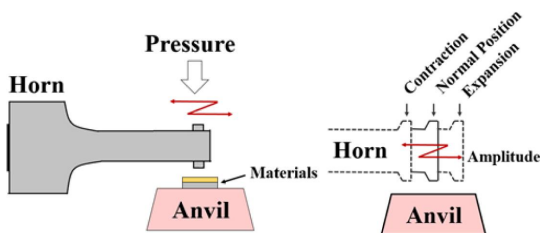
Basic mechanism of the ultrasonic welding
